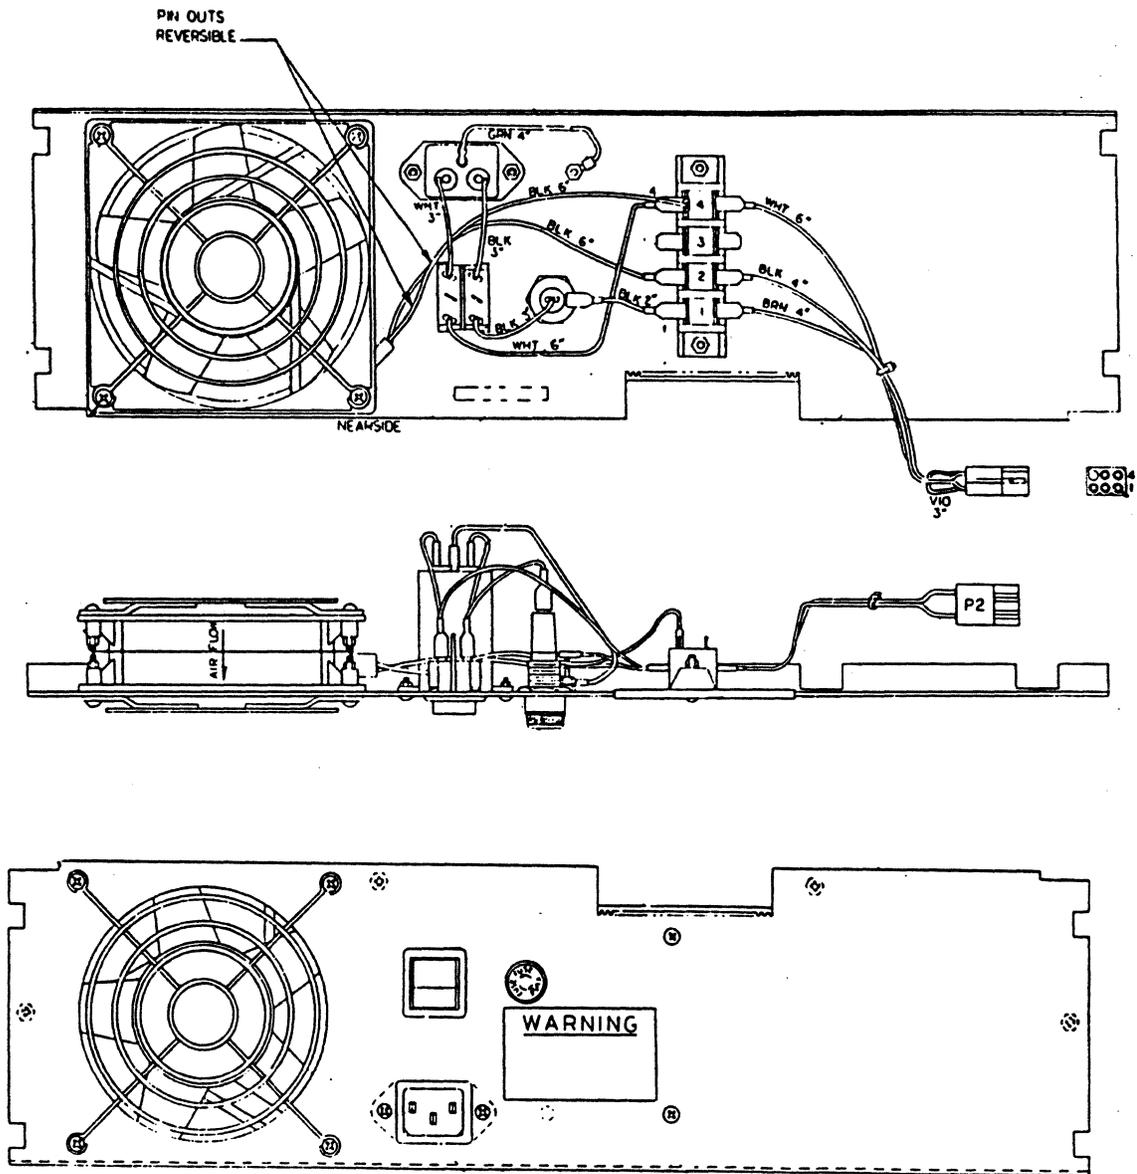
Rear Panel Assembly (Sheet 4 of 4)
